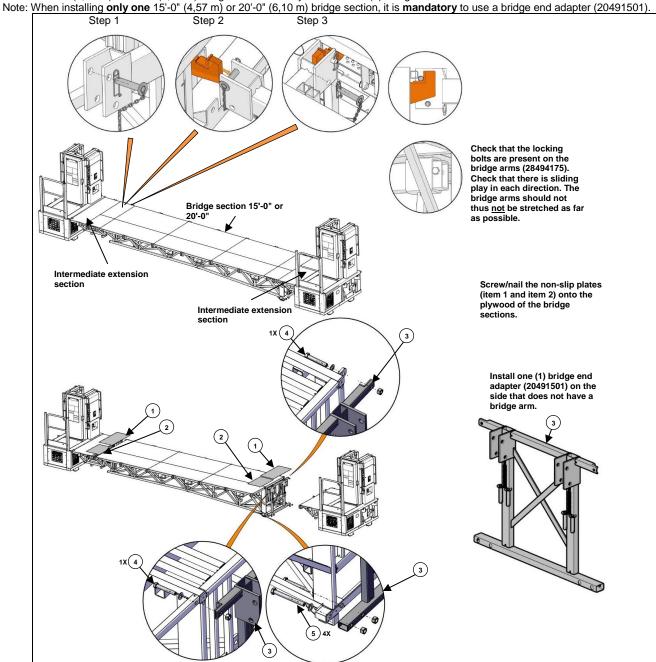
Installation of 15'-0" or 20'-0" bridge section between lifting units and/or intermediate extensions
